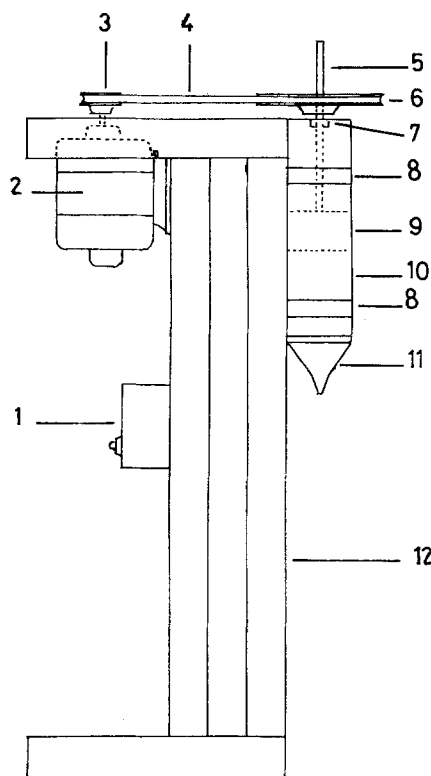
Feeding device assembly. 1: Motor speed control; 2: 220 V, 1/2 HP, 1800 rpm universal motor; 3: 72 mm (external Ø) drive pulley; 4: Drive belt; 5: 3/8" screwthread; 6: 192 mm (external Ø) drive pulley; 7: 3/8" nut; 8: Clamp; 9: PVC 100 mm (external Ø) piston; 10: PVC 100 mm (internal Ø) cylinder; 11: Output to the jar; 12: Stand
